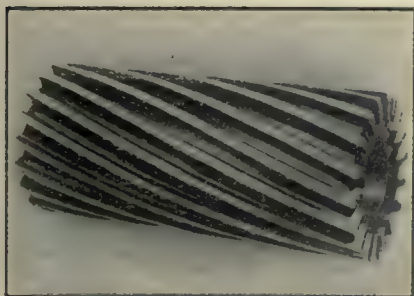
High Speed Inserted Steel Helical Blade Milling Cutter, 8 in. Diameter, $3\frac{1}{4}$ in. Bore, 18 Blades.
